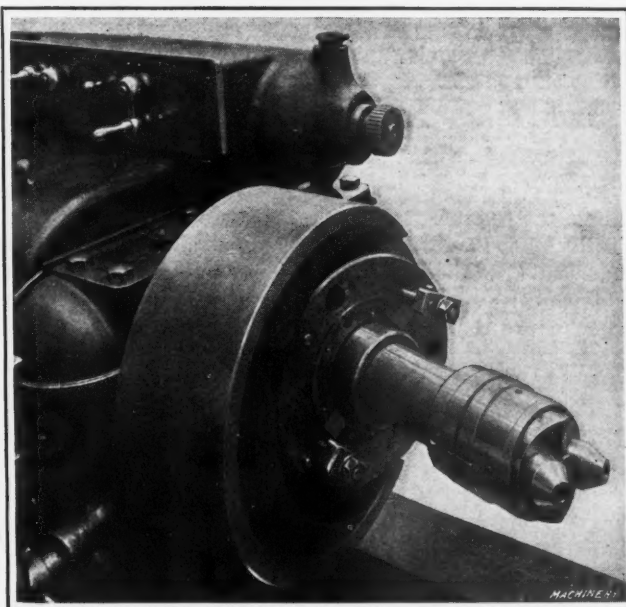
Close-up View of Machine provided with Inclined Fixture used in machining the Valve Guide Holes
